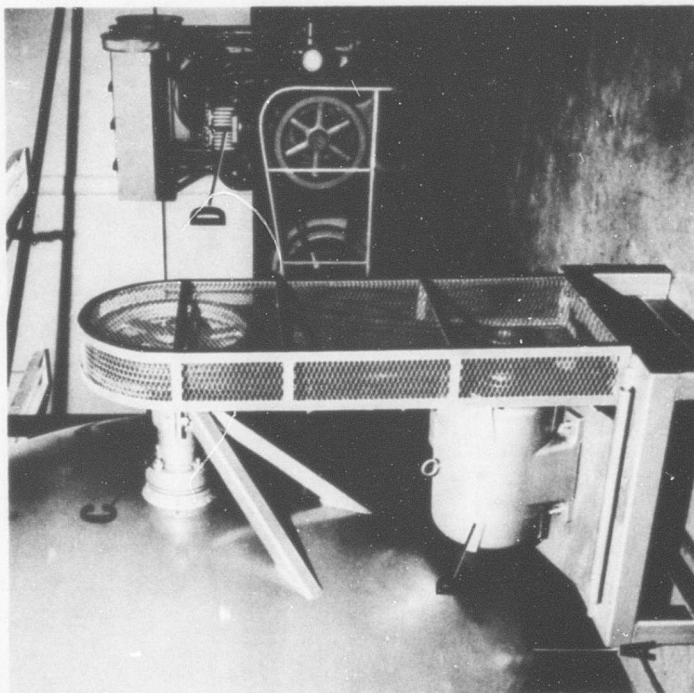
Rear View of Autoclave Showing Blower Drive System: A, Rear Head of Pressure Vessel; B, Blower Motor; C, Housing for Blower Drive-Shaft Pressure Seal (Tungsten Carbide Ring Rotating Against Carbon); D, Autoclave Compressor (300-cfm Capacity).
